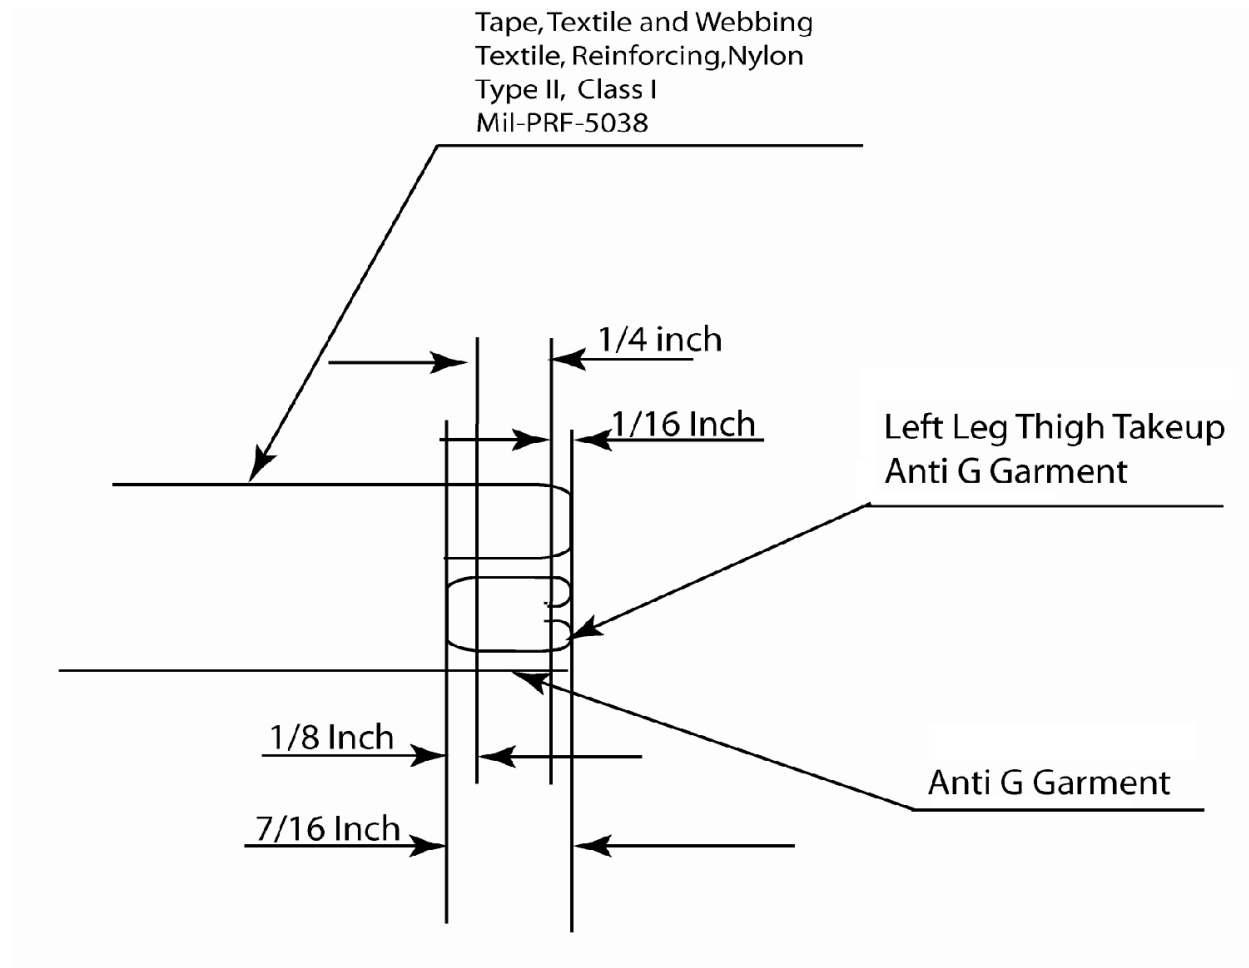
Attachment of kneeboard assembly to leg thigh take-up side.
